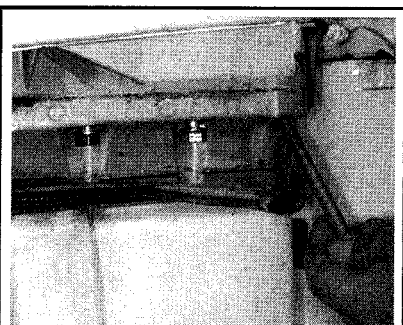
exhaust housing-to-powerhead bolts (on each side of the motor)
